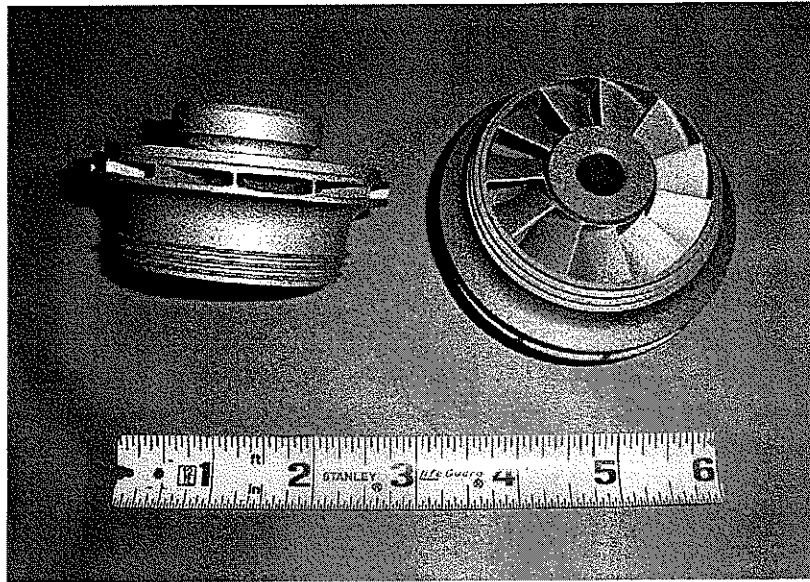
Shrouded Impellers Investment Cast from Rapid Prototype Models
